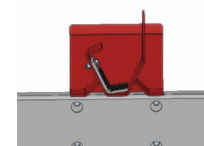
Axle shell incl. brake pad for Ø60 mm axle drum
